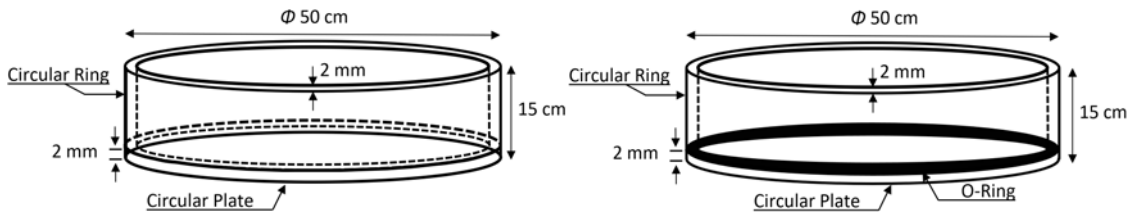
Schematic diagram of the dimensions of the plates with (right) and without (left) O-Ring between the circular base and the circular ring.
